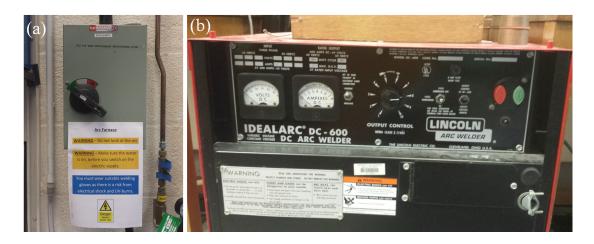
(a) Power source for the welding unit and (b) control panel for the welding unit.
